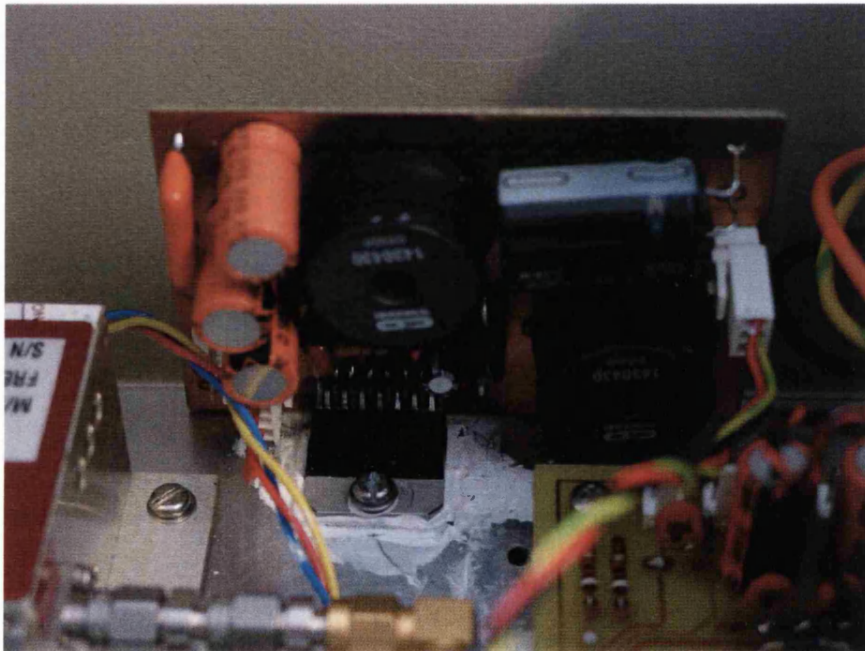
Switched 6V regulator board, mounted with IC in contact with the lower aluminium plate for heat sinking
